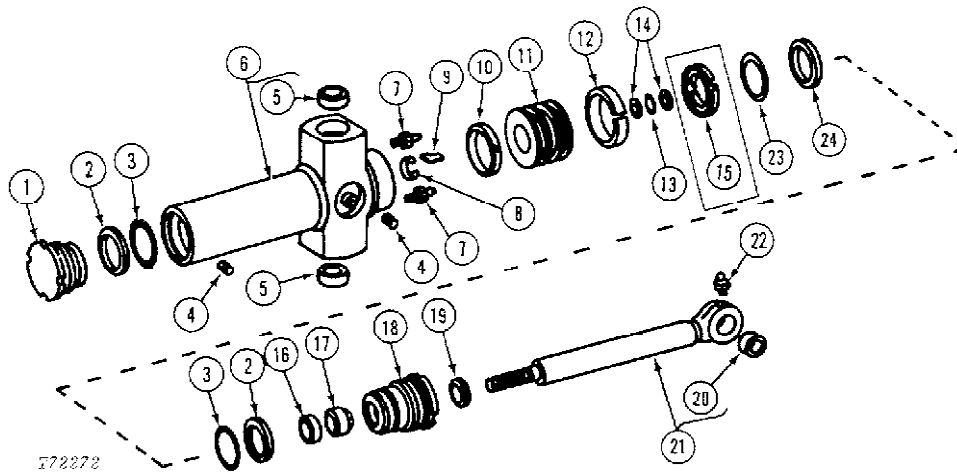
Backhoe Bucket Cylinder Assembly
